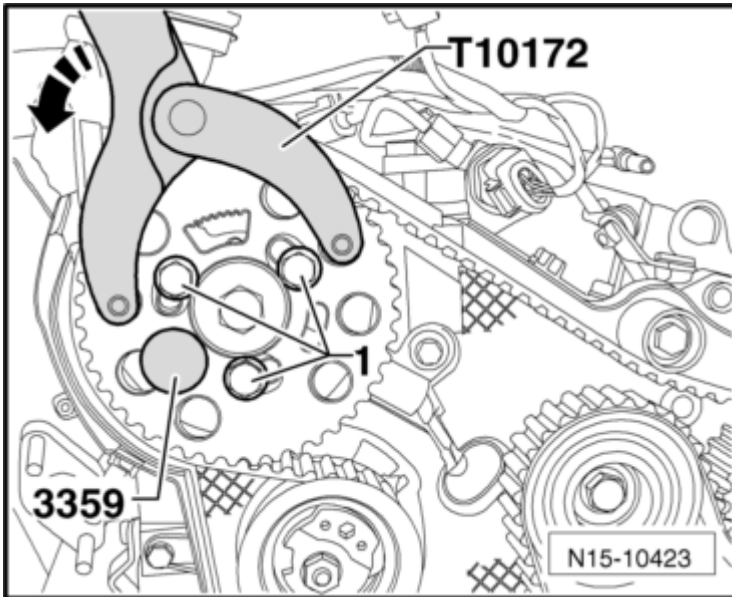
Identifying T10172 Pushed In -Direction Of Arrow- And Bolts -1-
